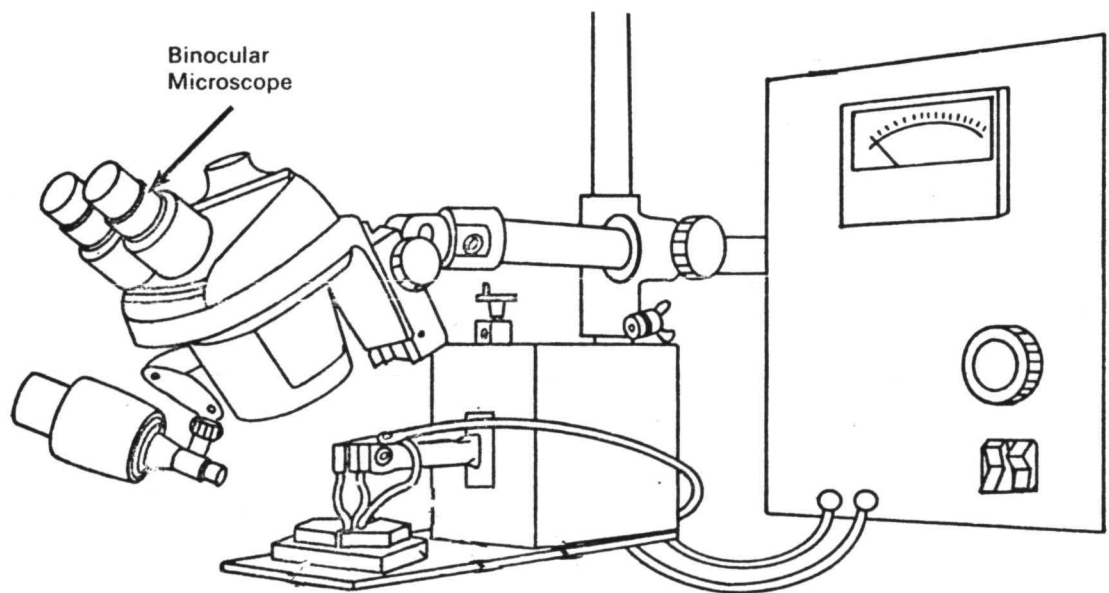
The Butt-Welder for Fine Gauge Wire apparatus developed at Langley Research Center
